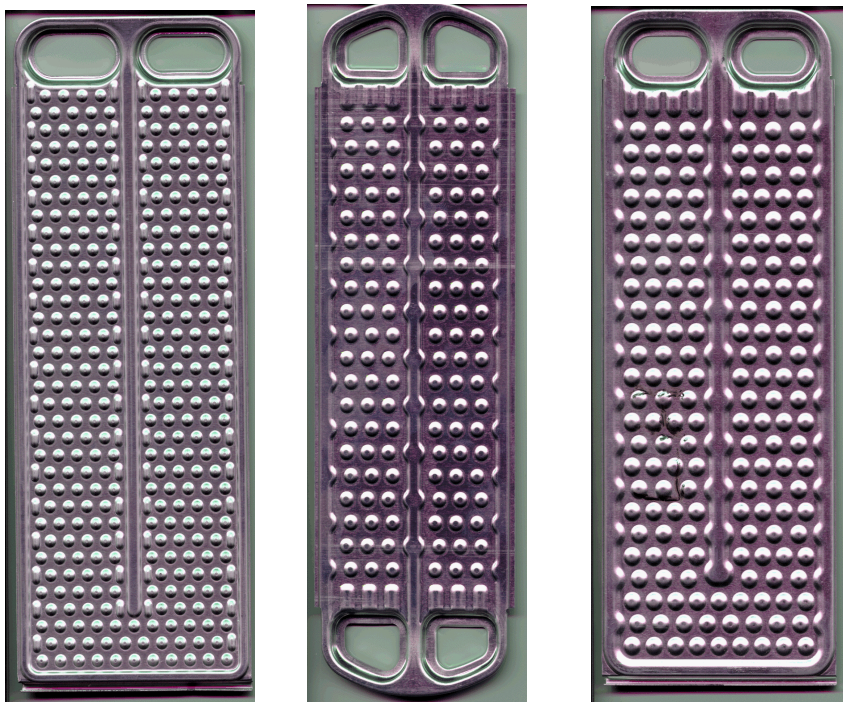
Photographs of three different single stamped plates used to make evaporators showing their internal structure design.
